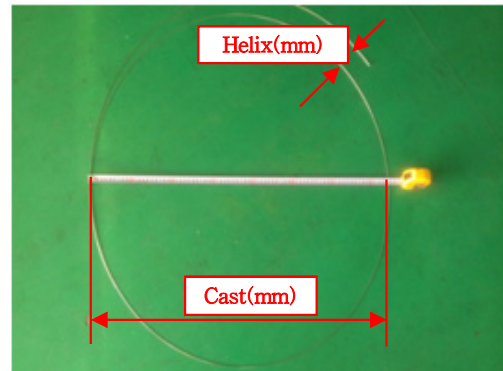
Measurement of cast and helix of welding wire
